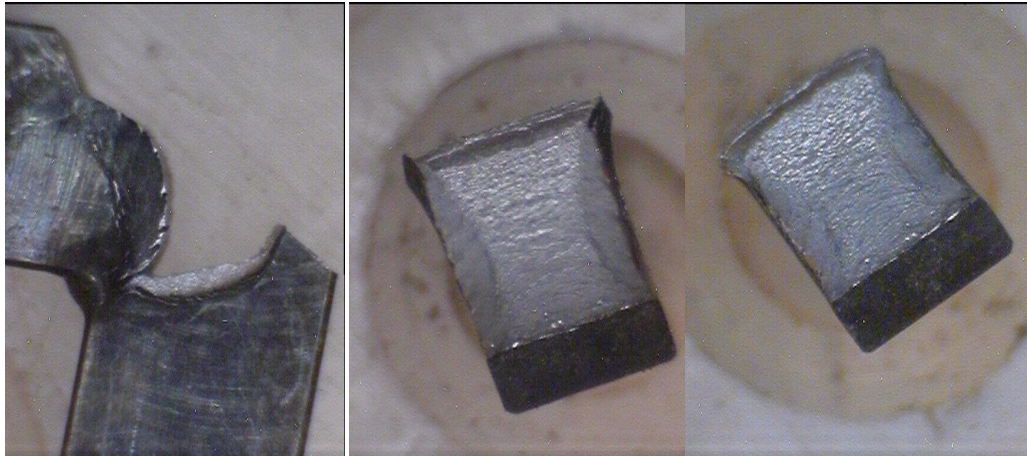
Tested impact specimen H 155 after testing (Macro) and after complete breaking (SEM)
